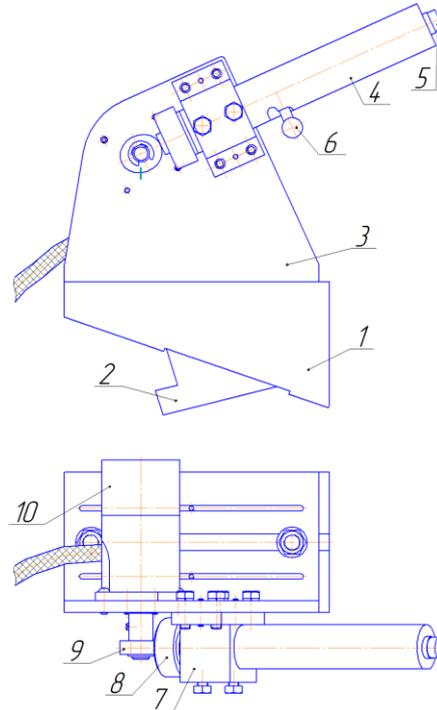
Construction design of the following grinding steady rest: 1 – bearing plate; 2 – clamp strap; 3 – rest body; 4 – barrel; 5 – plunger; 6 – pin lock; 7 – flange; 8 – screw-nut; 9 – profile cam; 10 – servomotor.
